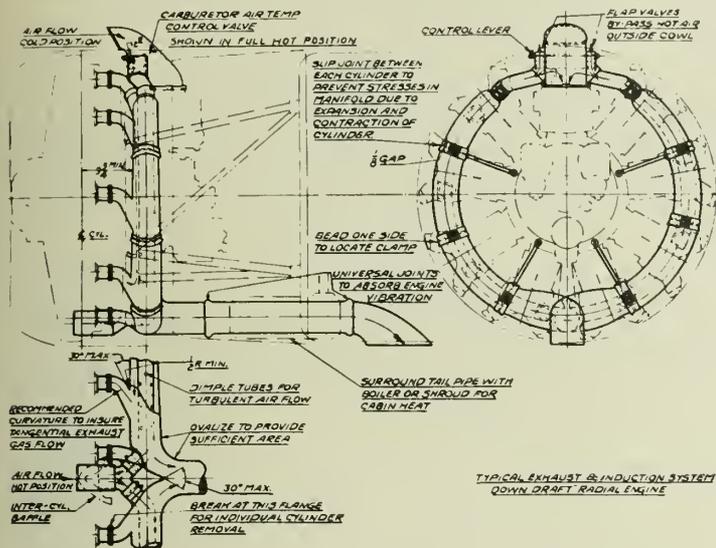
Exhaust Arrangement of Wright Cyclone Engine.
